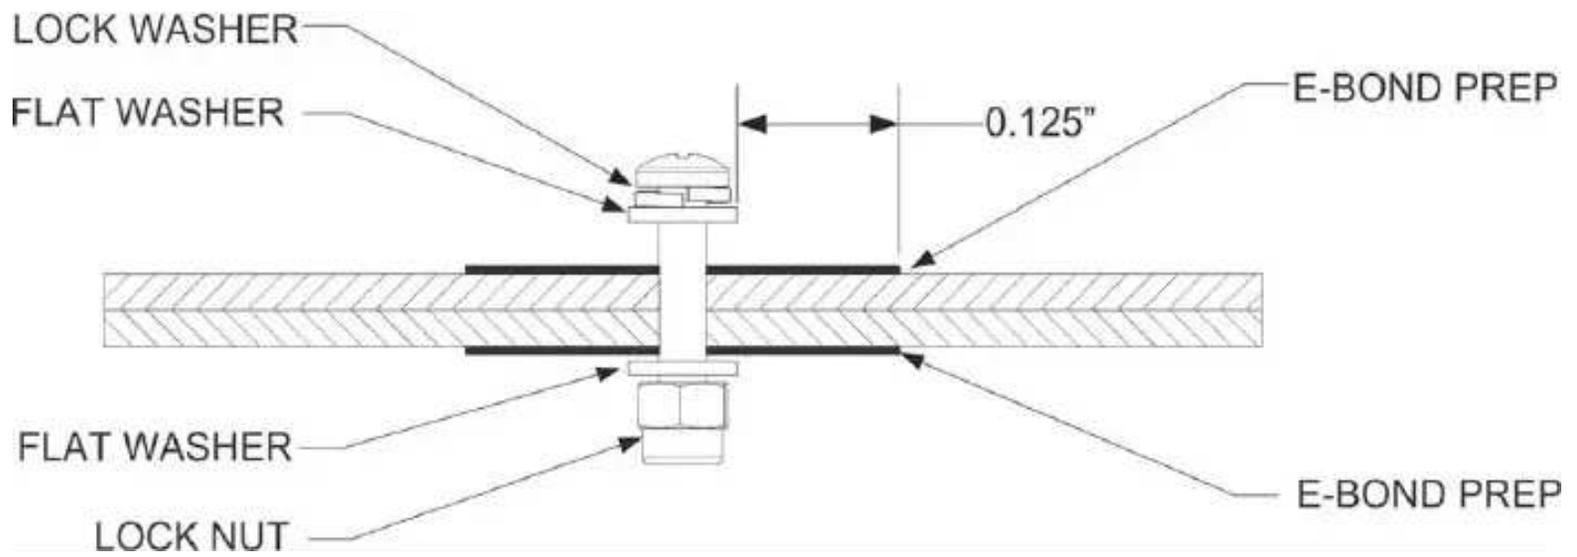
Electrical Bonding Preparation – Bolt/Nut Joint
